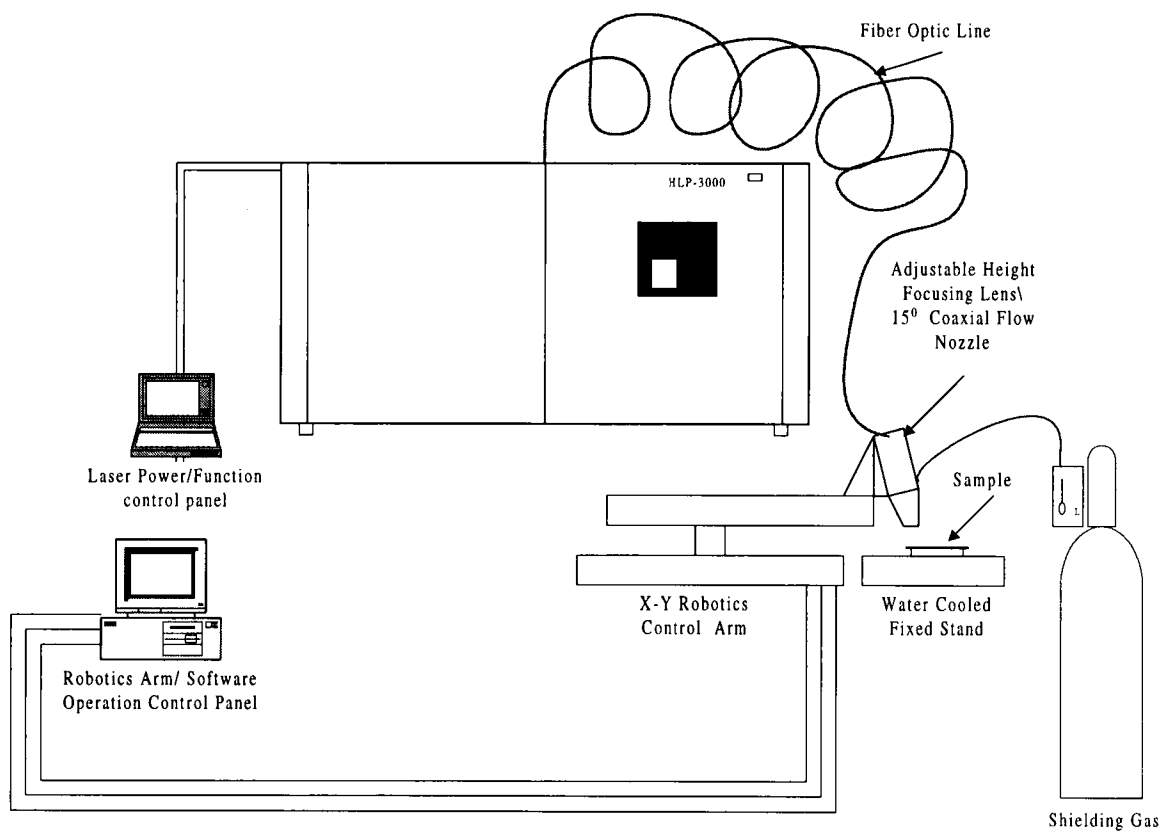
Lay-out of Hobart HLP-3000 laser and robotic arm assembly.
